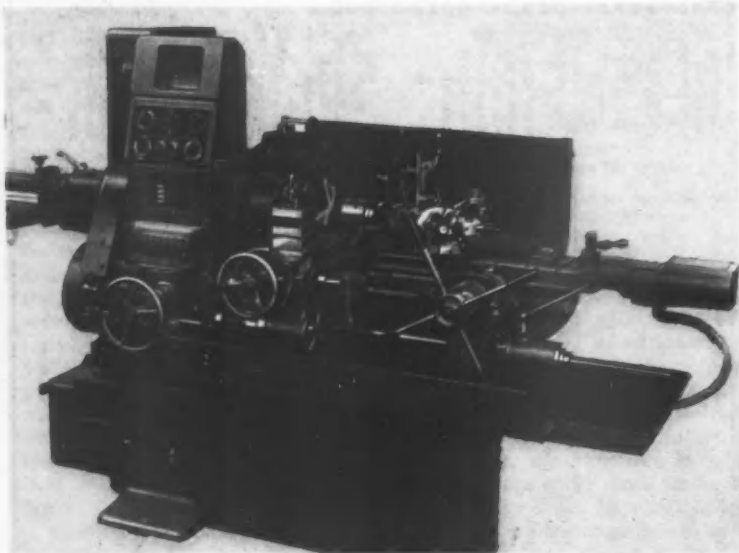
Patch board control of this Herbert 2D capstan lathe regulates the speed, start, stop and reverse of the spindle as the turret is indexed
